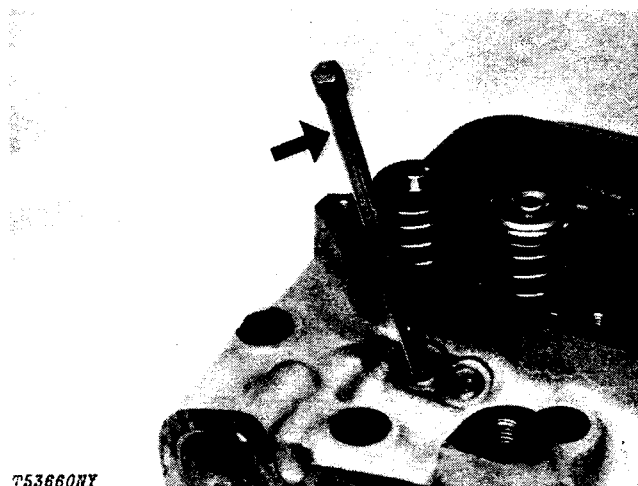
JDE-39 Nozzle Bore Cleaning Tool
